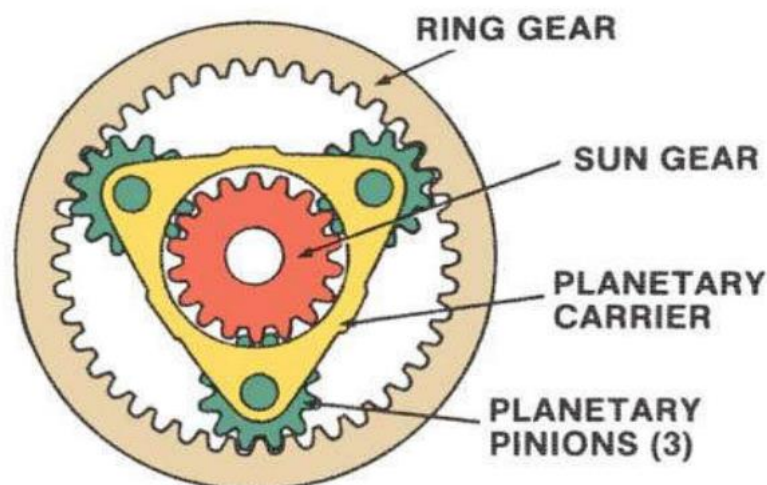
Planetary gear box layout (S.H. Gawande, 2014)
